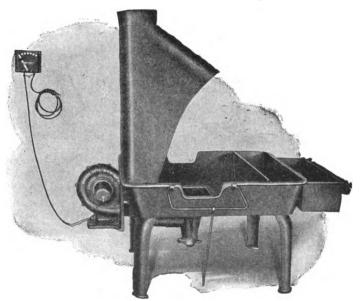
Modern Motor-Driven Forge Courtesy of Canedy-Otto Company
